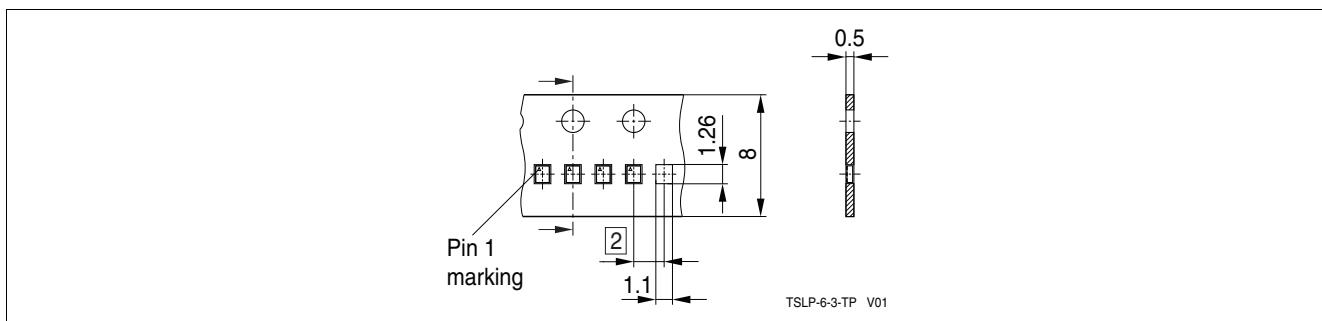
Tape & Reel Dimensions (\varnothing reel 180 mm, pieces/reel 15000)
